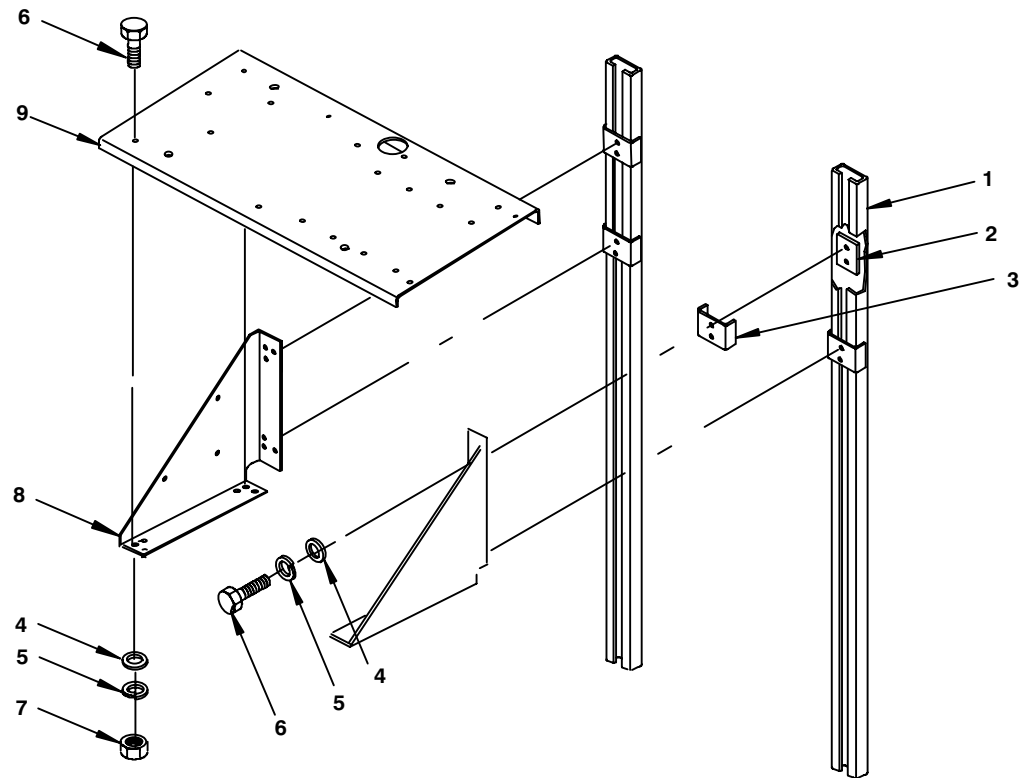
(2). Electrical Equipment Shelf Installation: Alternate Installation A
